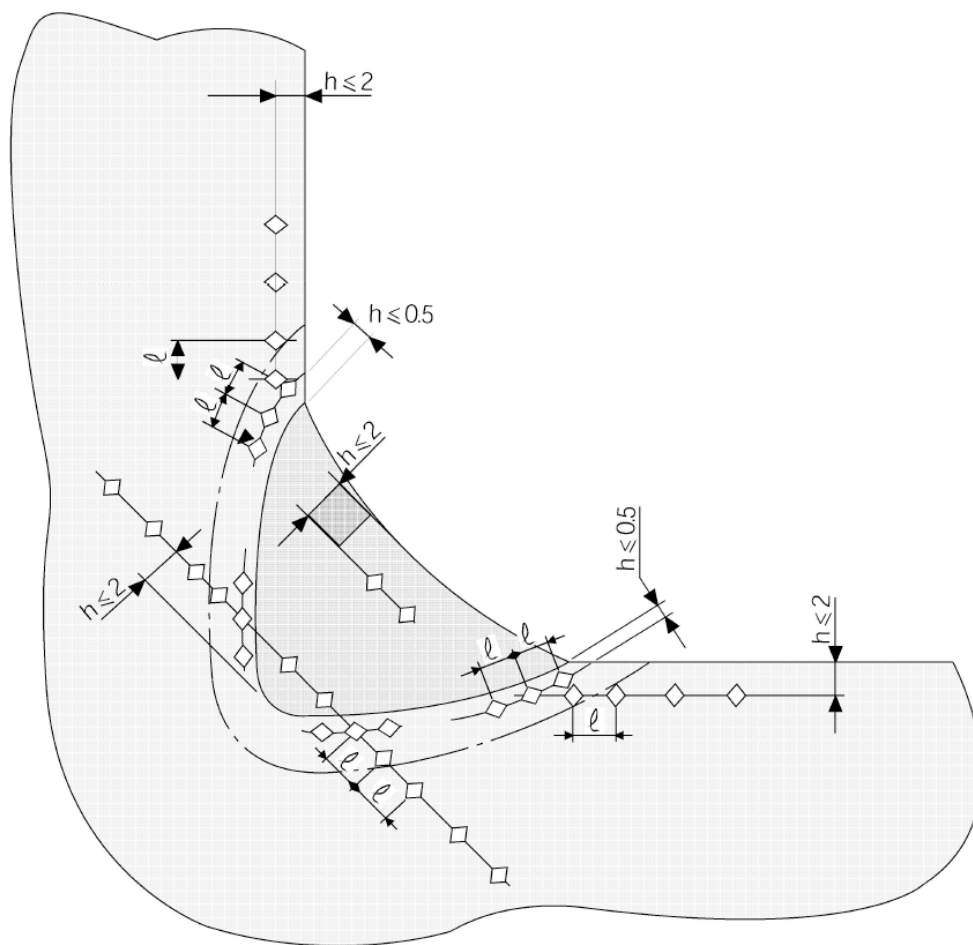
Example of hardness indentations in fillet weld
